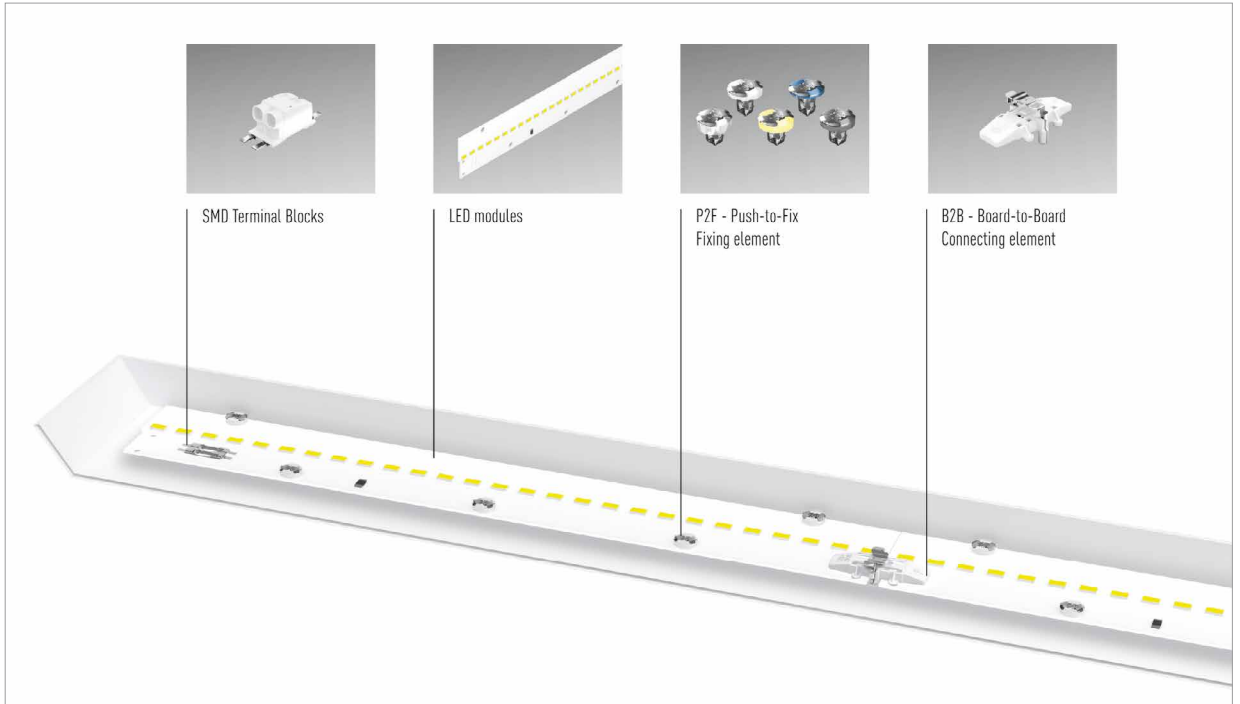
Consisting of a metal spring and elastic silicone, the Push-to-Fix element ensures a large area of contact between the circuit board and the luminaire housing, resulting in excellent heat dissipation
